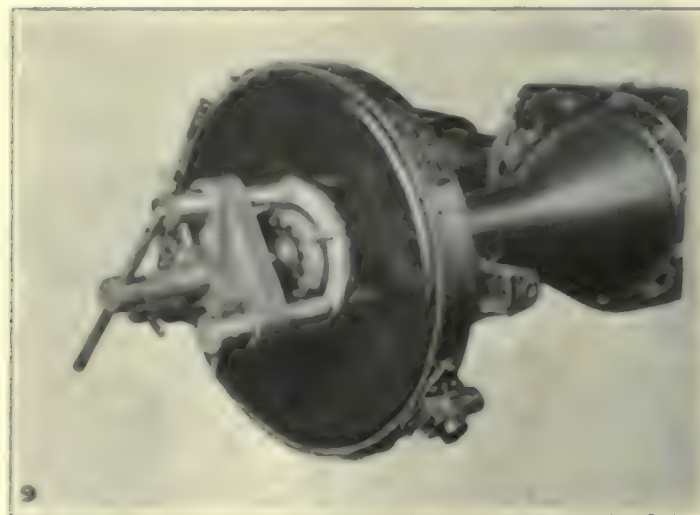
READY TO PULL THE DRIVING PINION. FIG. 8—DIFFERENTIAL UNIT WITH AXLE HOUSINGS REMOVED. FIG. 9—PULLING THE REAR-AXLE BALL BEARINGS. FIG. 10—REAR AXLE PARTLY DISASSEMBLED. FIG. 11—SHOWING CONVENIENCE OF WORK STAND. FIG. 12—AXLE HOUSING REMOVED SHOWING INNER BEARING
